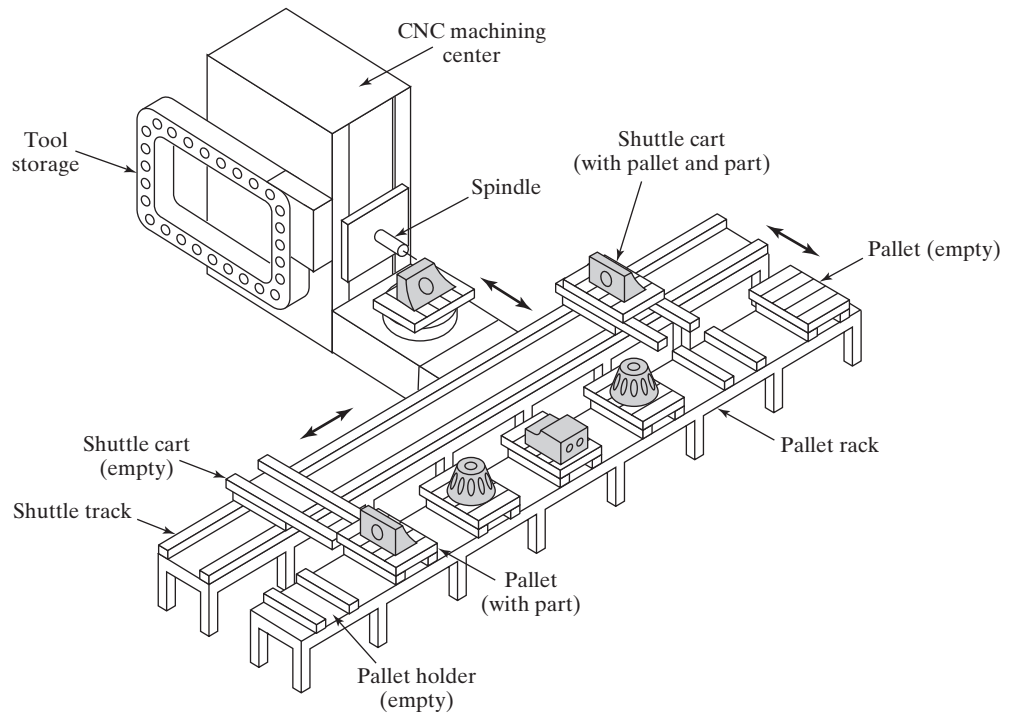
Single-machine cell consisting of one CNC machining center and parts-storage unit.
